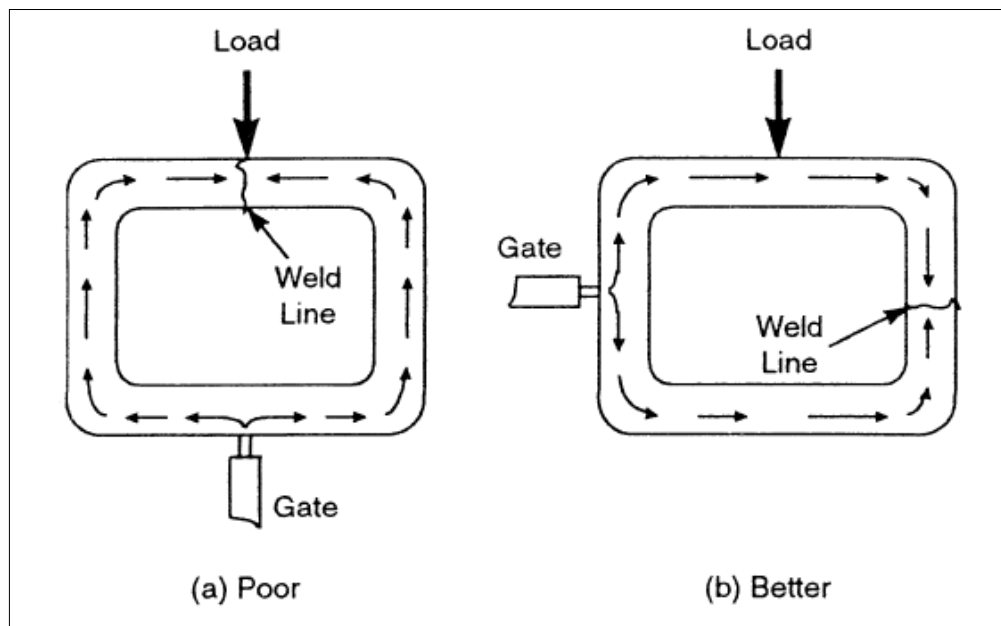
Weld lines form when the plastic flow divides into two or more paths. (a) This gate location causes a weld line to form in a critical region of the part. (b) This gate location causes the weld line to form in a less critical region.
